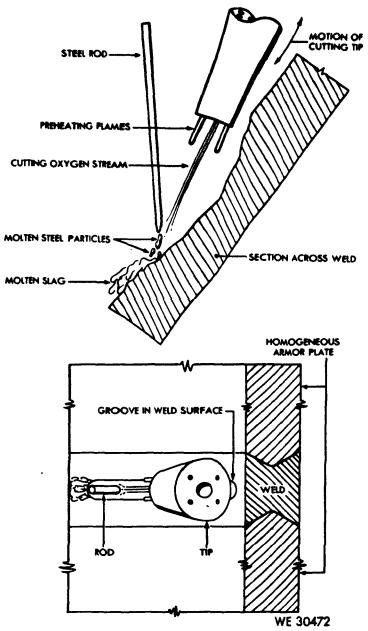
Method of removing surface defects from stainless steel welds.
